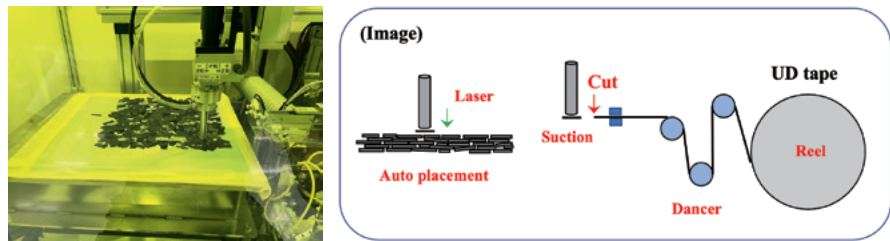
Auto cut-tapes placement machine for random-sheet fabrication.
